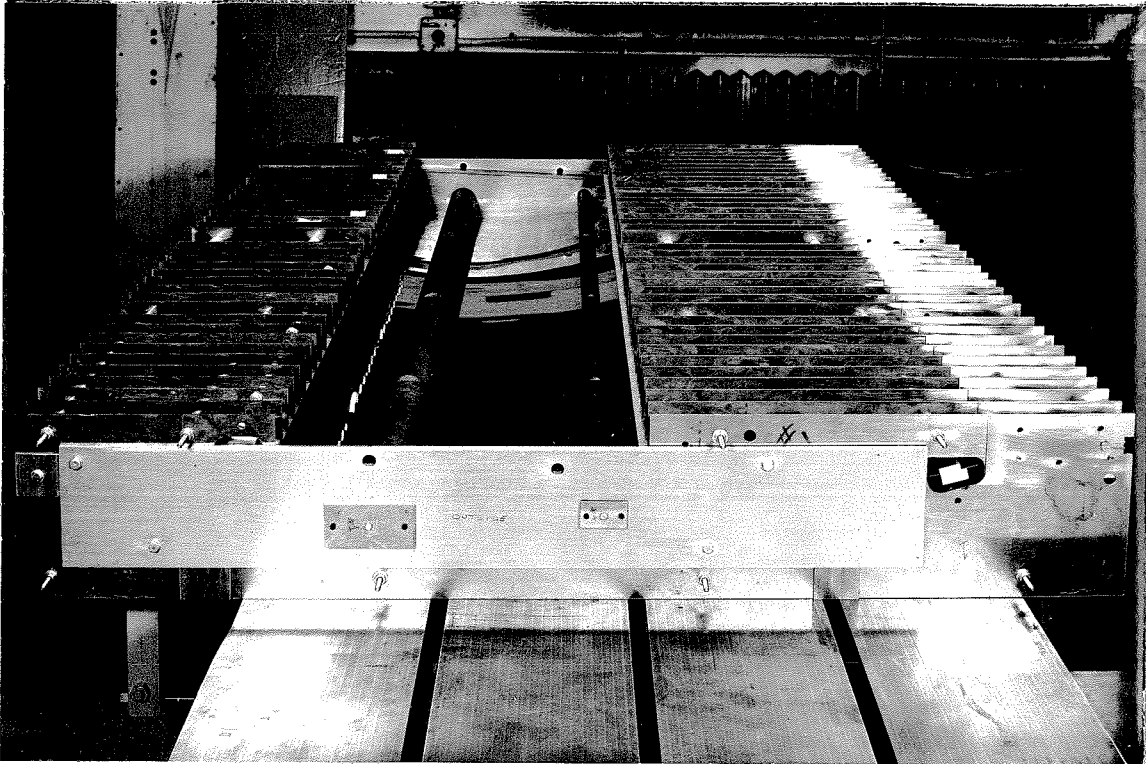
Mold used for fabrication of main airfoil section. Tubular spars are located about 25.5 cm apart.
